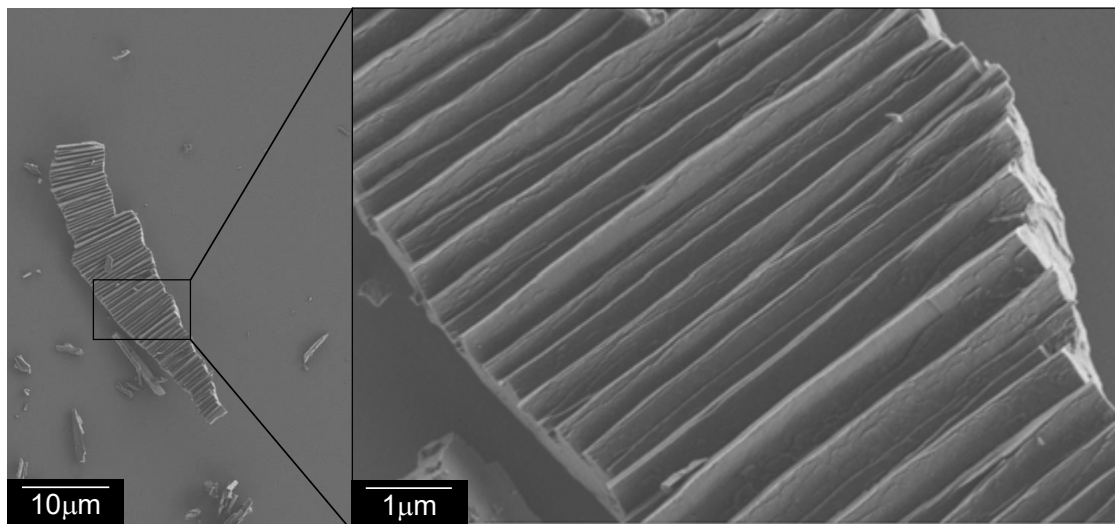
Saw-tooth chip along the 210° cutting direction on the (111) plane.
